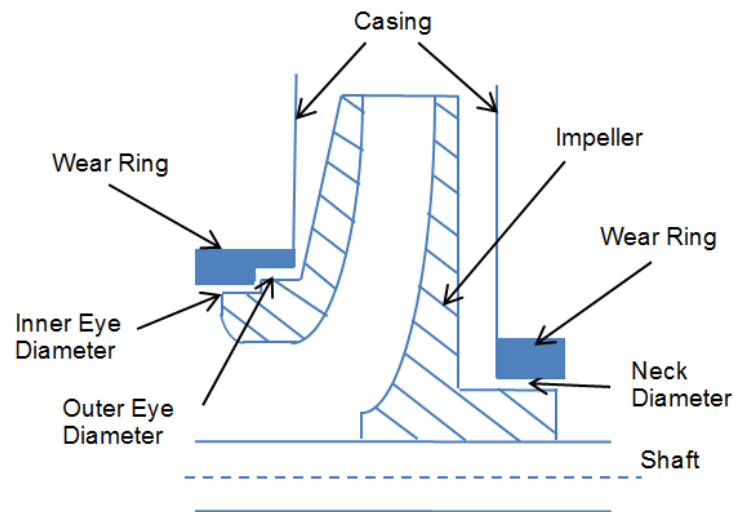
Kriel EFP 2<sup>nd</sup> – last stage impeller sectional view
